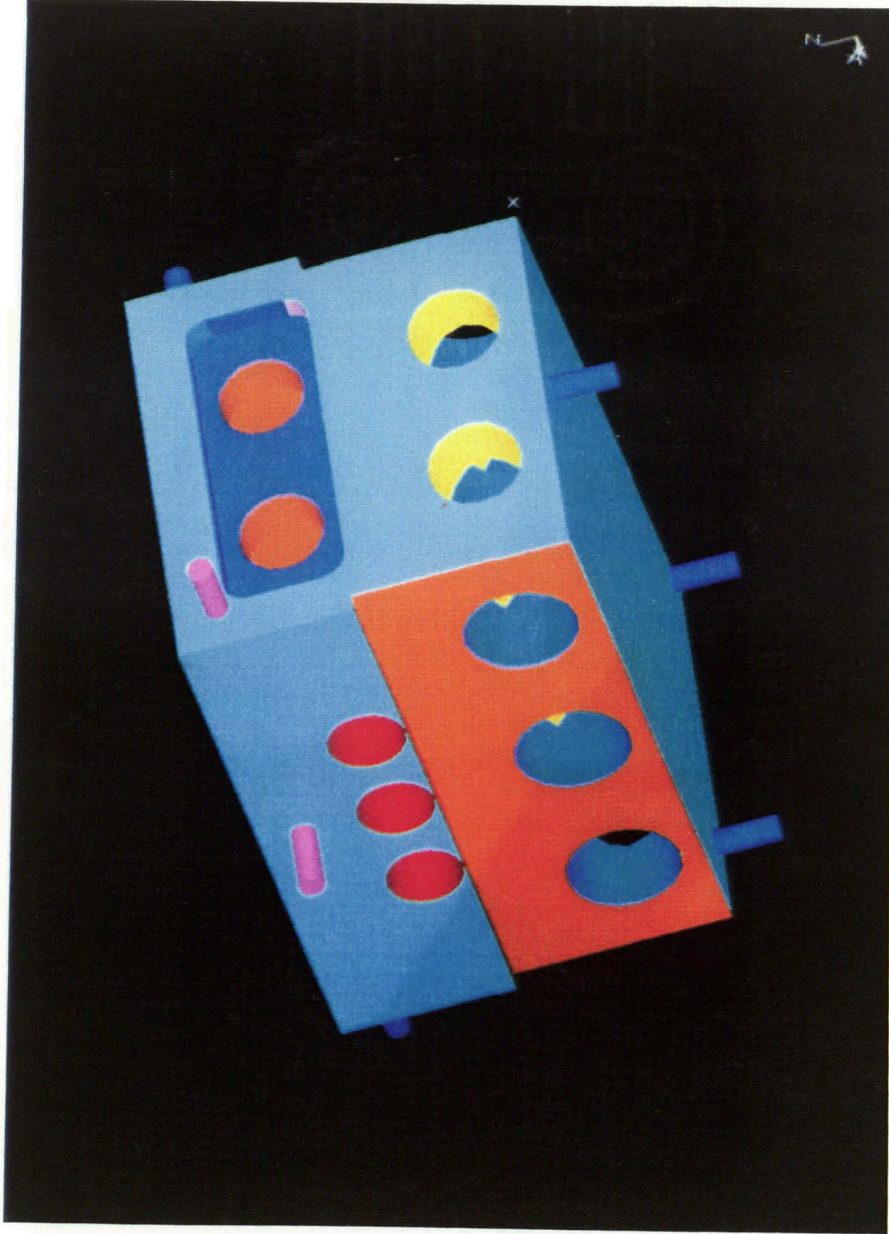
An isometric view of the workpiece with locators in blue and clamps in magenta
